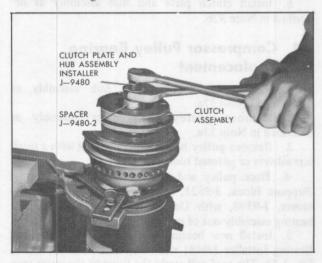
Installing Clutch Plate and Hub Assembly
